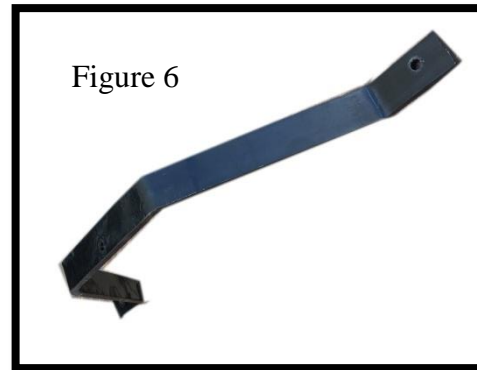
Shows the Outboard Support for the clutch and brake pedal post.
